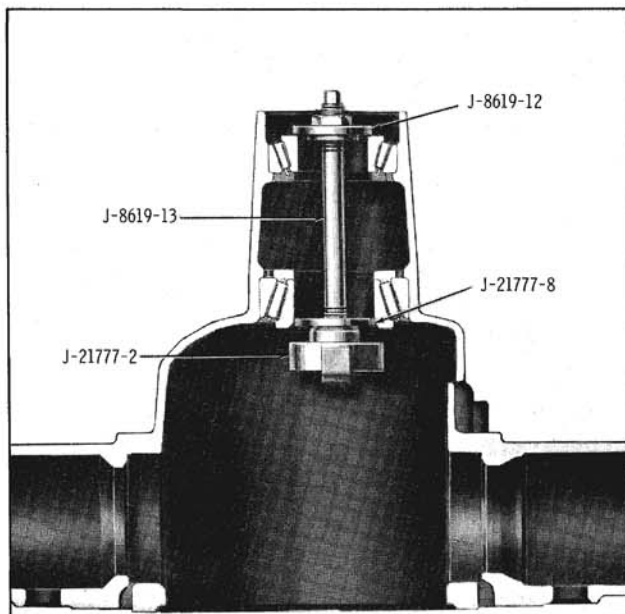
Installing Gauge Plate (54 through 86 Series)
